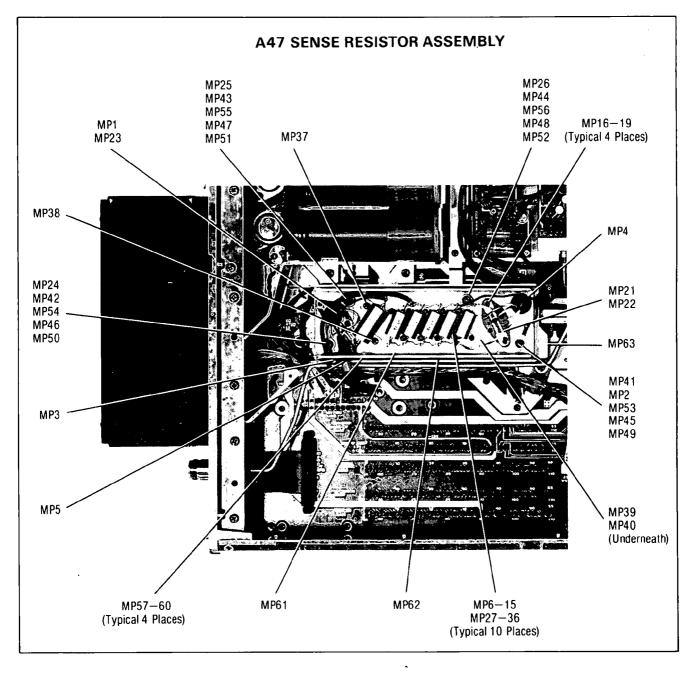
A47 Sense Resistor Assembly Mechanical Parts Location
